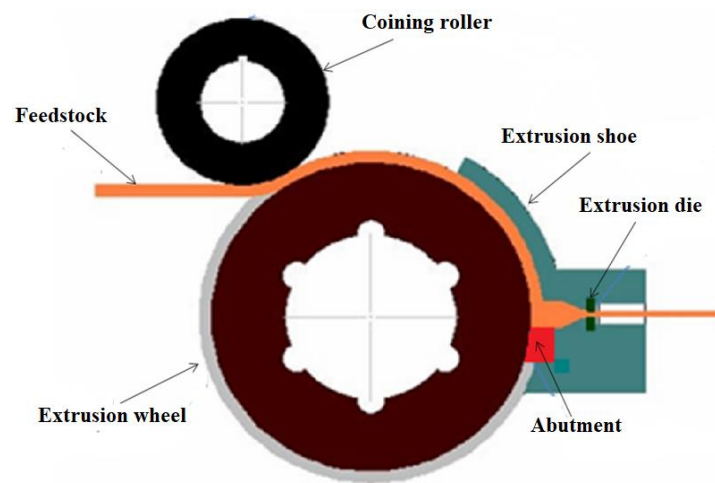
3: A CAD MODELED ELEMENTS WITH ASSEMBLY OF CE
